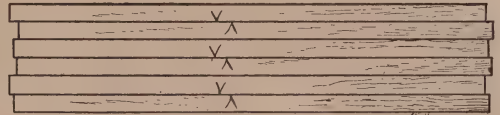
Edge Marks, showing how Pieces are arranged in Pairs when Setting Out
